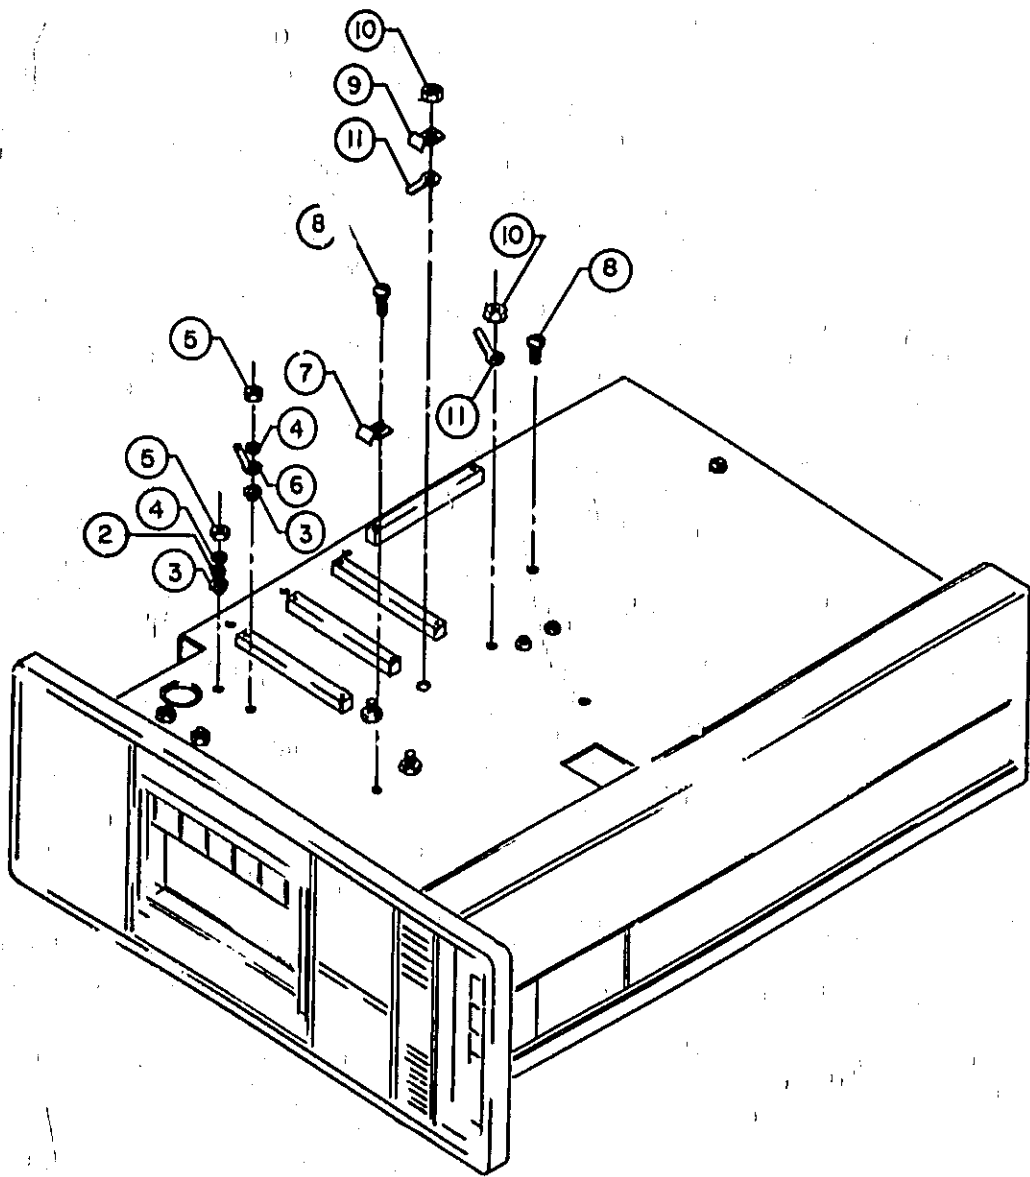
Exploded View of Chassis Assembly (III) (Sheet 1 of 1)
